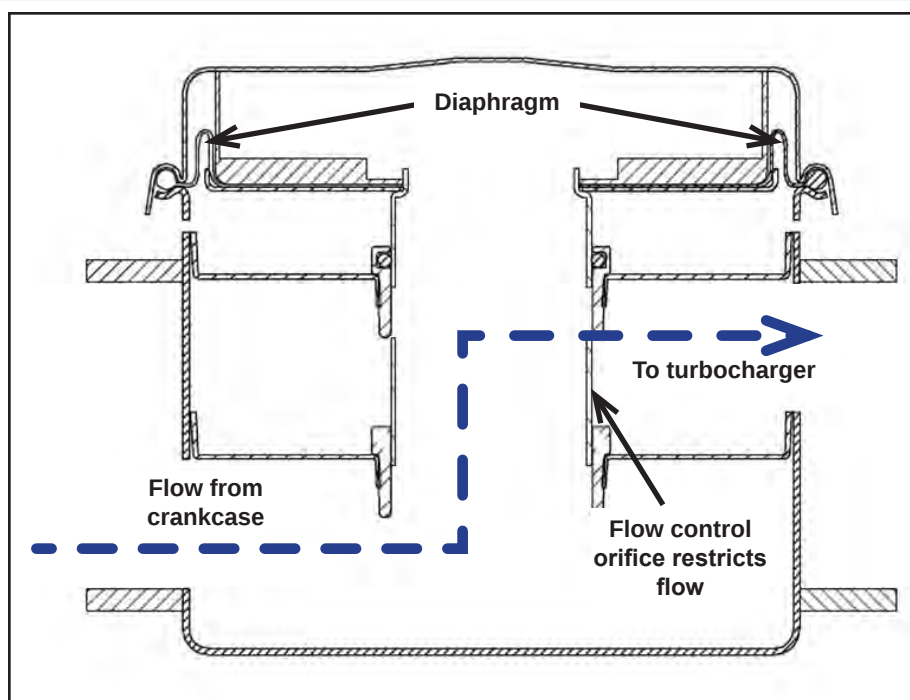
Cutaway of crankcase pressure regulating valve under full load
